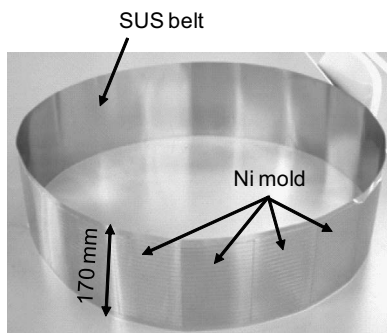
Appearance of the belt mold. The Ni molds are mounted on the SUS belt surface.
